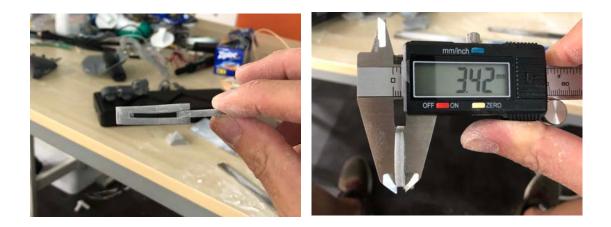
Bulge in printed component Figure 3.101 Inaccurate dimension of printed component
